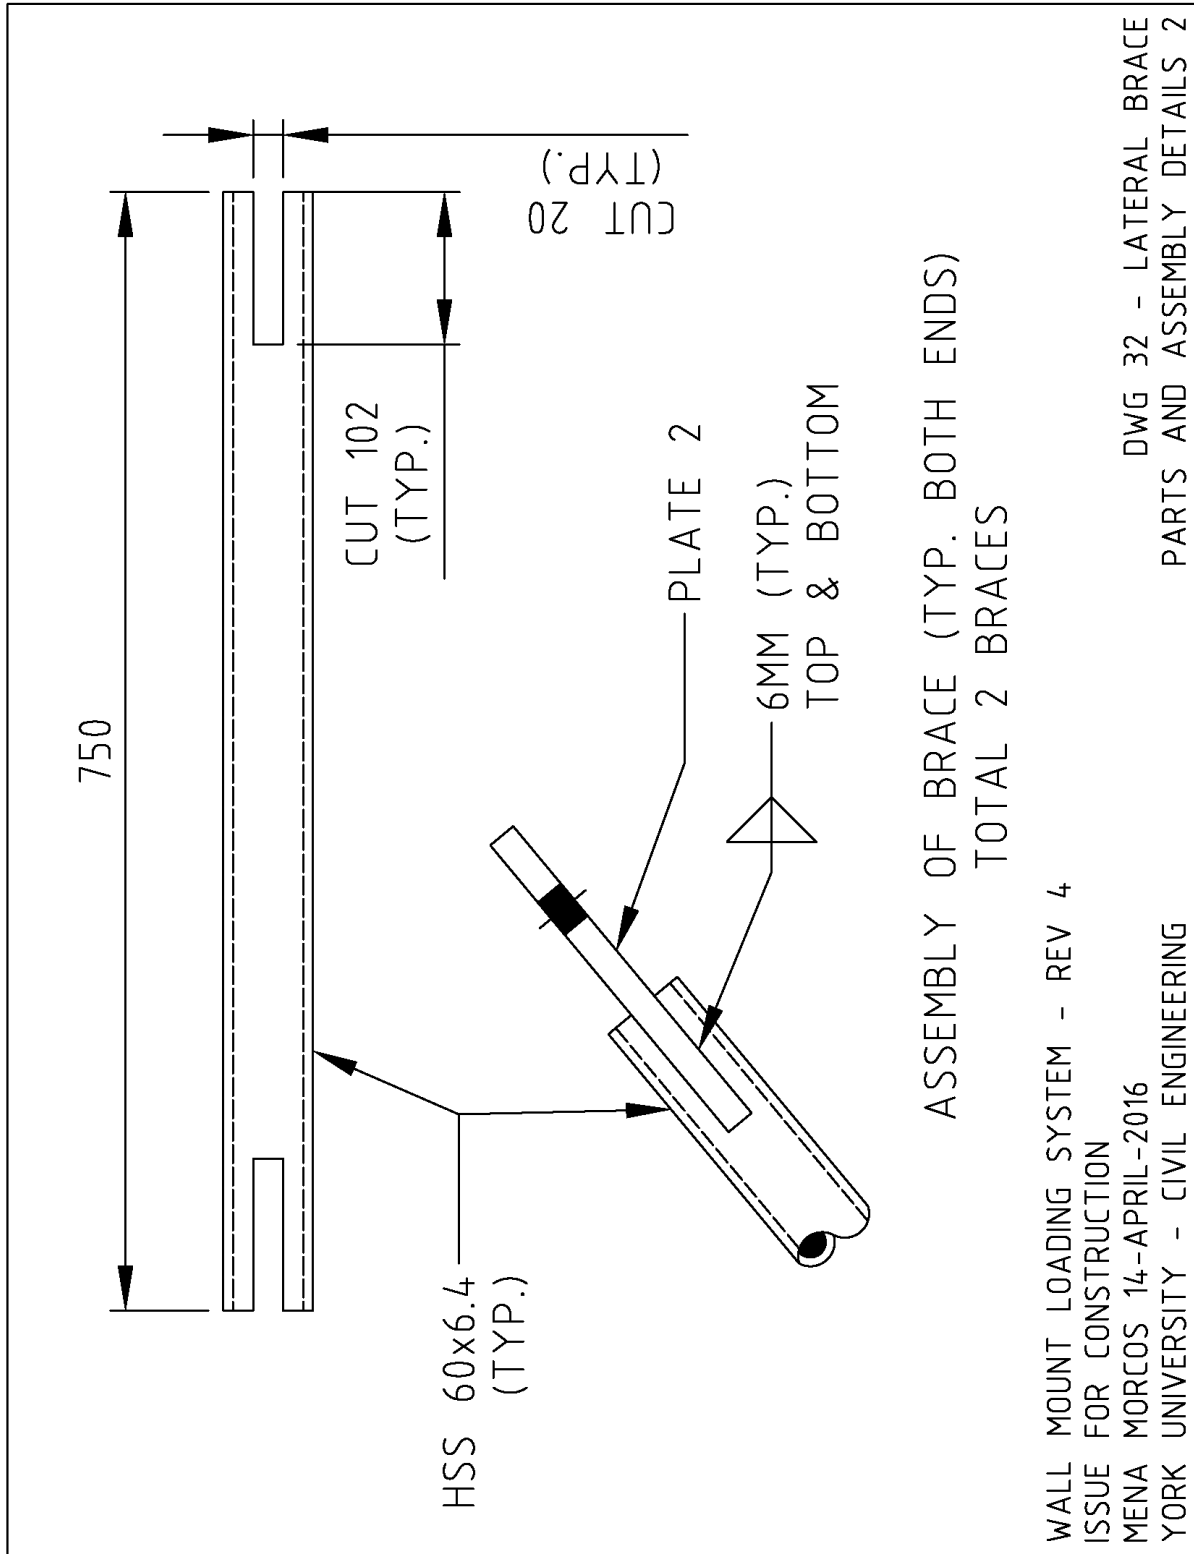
Wall mount loading system design and fabrication drawing – Drawing 32.
